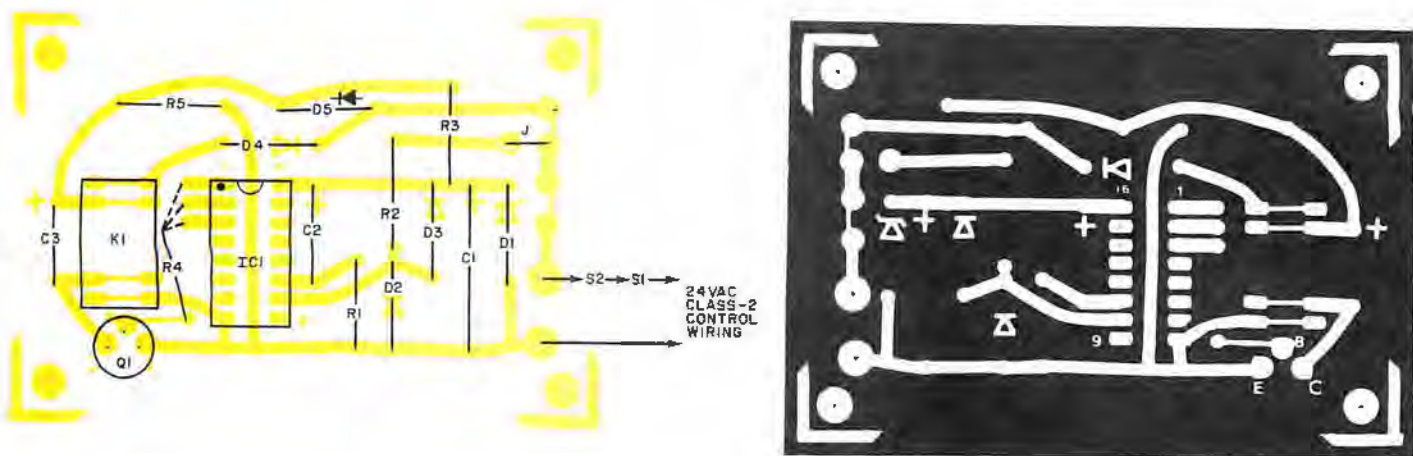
Etching and drilling and parts placement guides for a suitable pc board.
